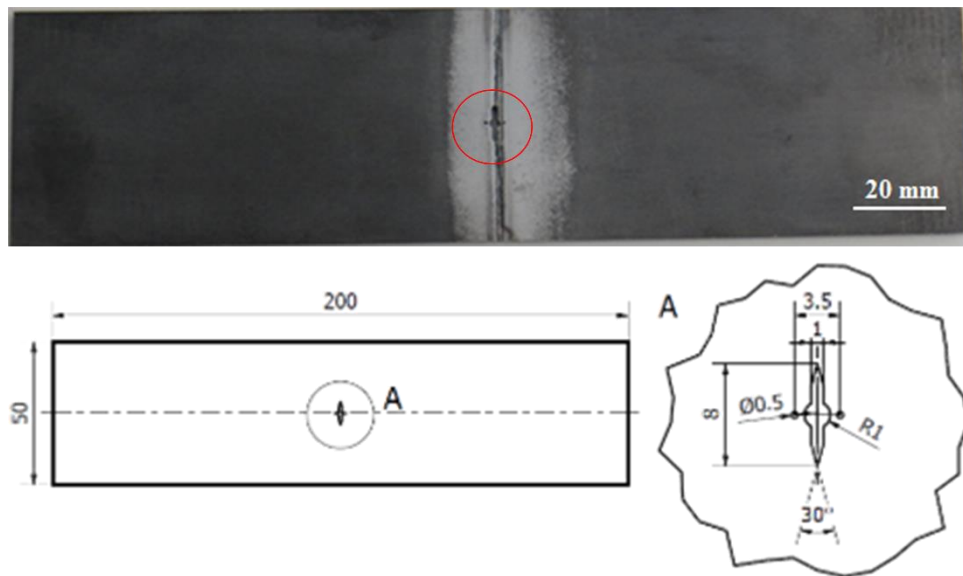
Specimens geometry used in FCGR tests, dimensions in mm.
